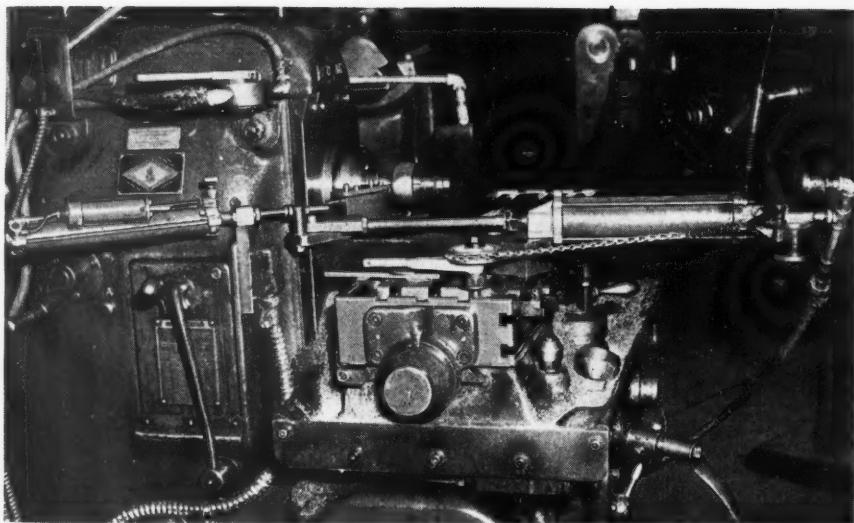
The finished turning operation is performed on this Cincinnati Milling Machine, which is equipped with a "Senacon" power feed, controlled by a "Hydro-Check." The tool is fed by pneumatic power; the rate of feed is controlled by hydraulic power. This device provides any rate of feed required, and the quick operation of the device eliminates non-productive time.
